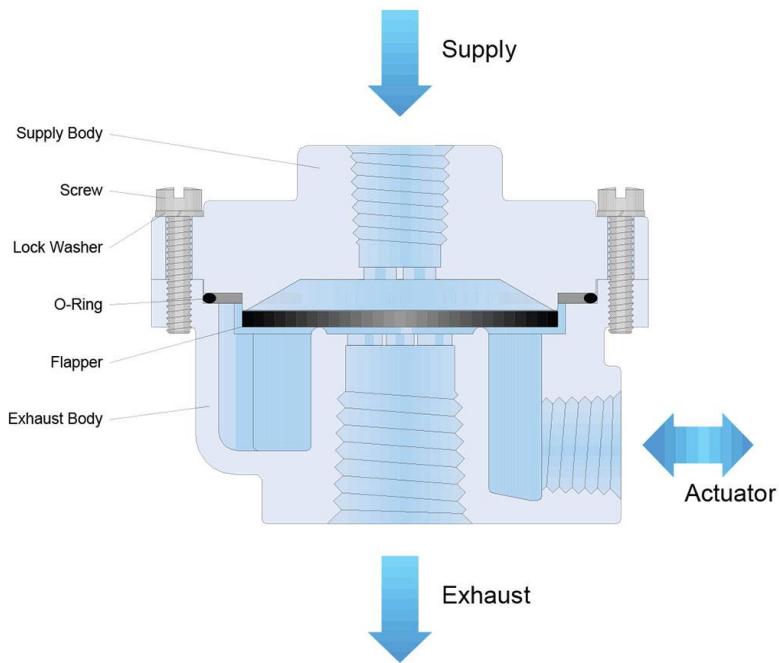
Quick Exhaust Valve Diagram [14]
